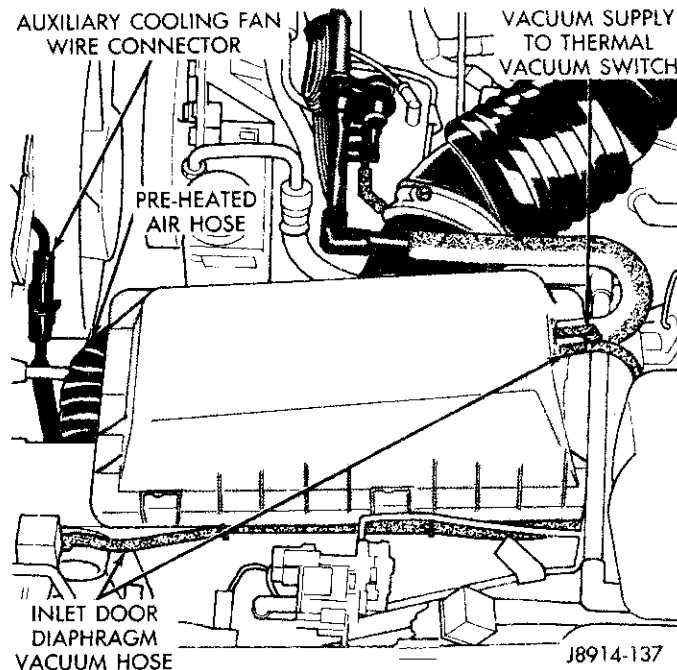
Auxiliary Cooling Fan Wire Connector, TAC Hoses, Preheated Air Hose
